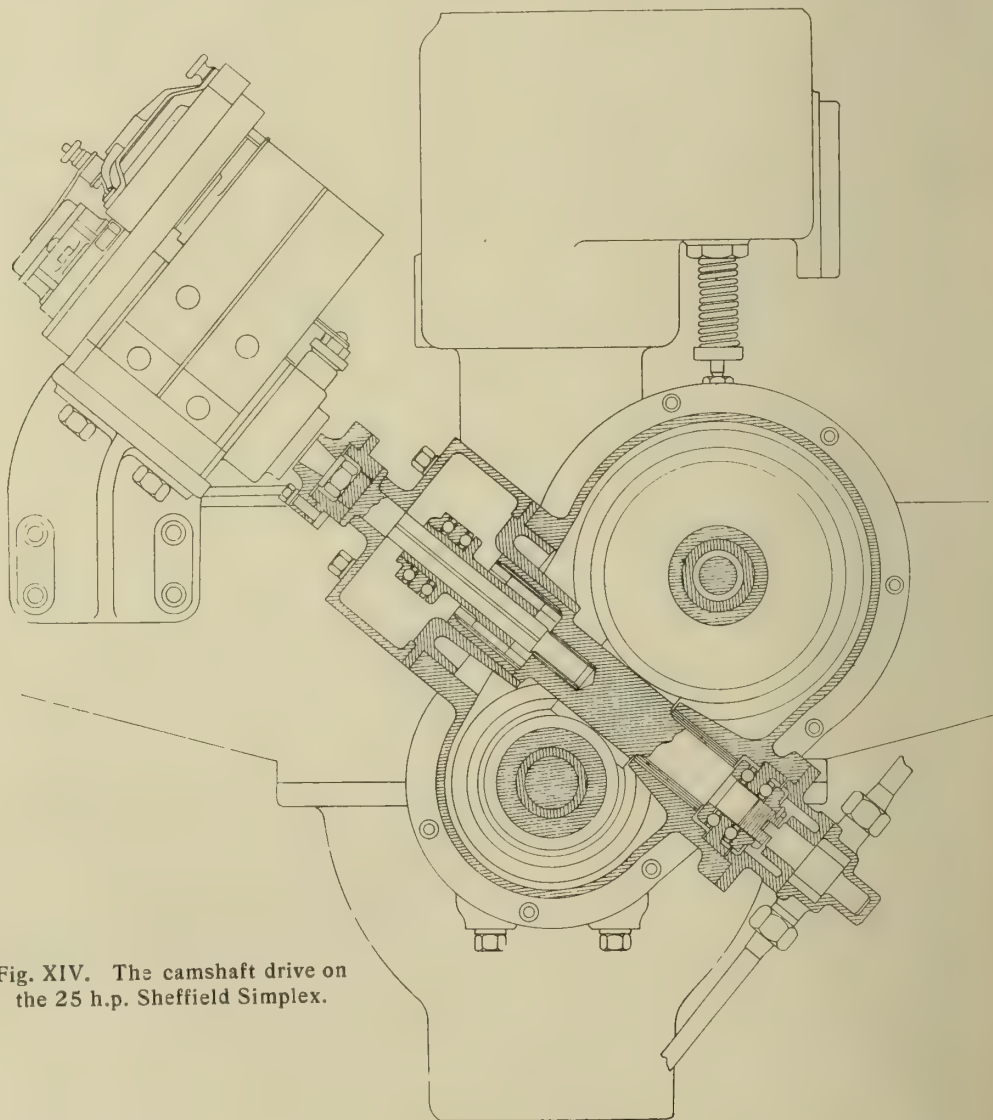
Fig. XIV. The camshaft drive on the 25 h.p. Sheffield Simplex.
